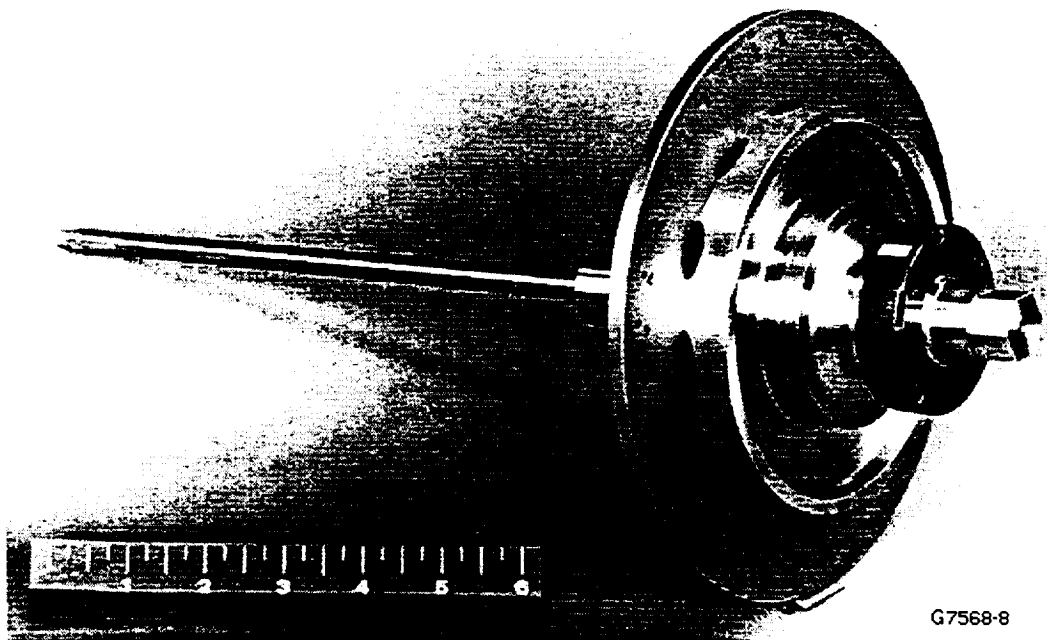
Photograph of Arbor and TMC Ring Assembly. Note the Castellated "Soft Touch" Fingers of the Support Disk.
